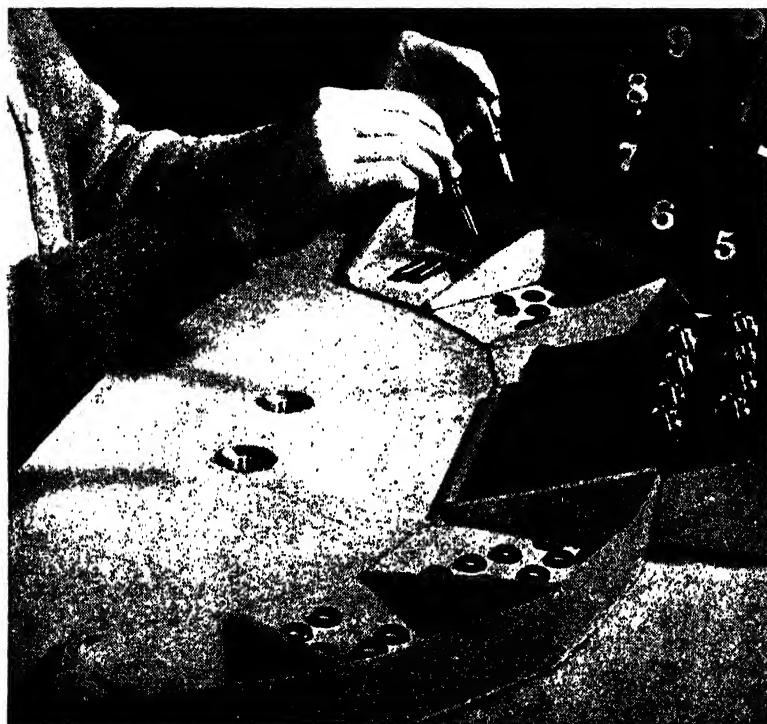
Arrangement which permits parts to be slid into fixtures.
